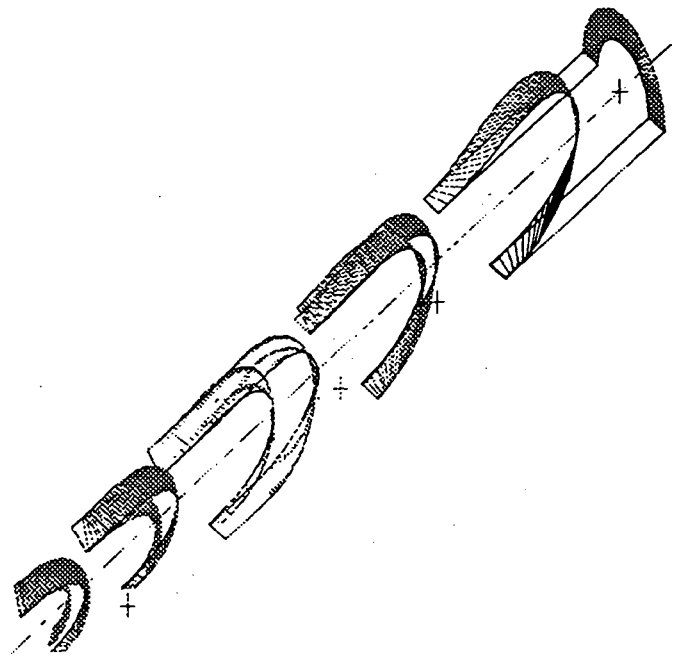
A typical set of coil return pieces for a cosine-theta layout.
